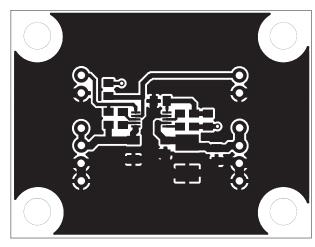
Recommended PCB Layout for TPS6050x (top layer)
